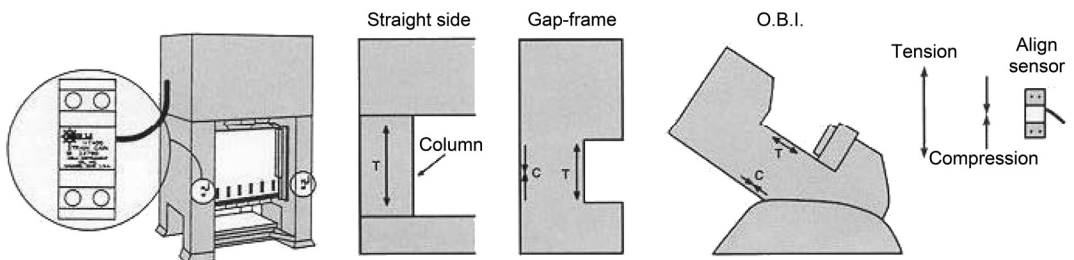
Frame mounting locations for force sensors. O.B.I., open back inclinable. Source: Ref 15.8
